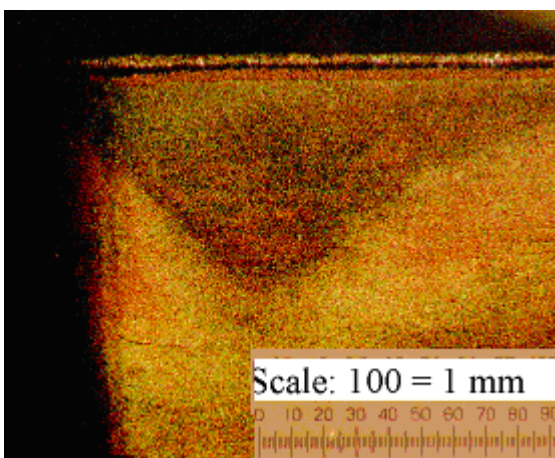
Picture showing flank wear for a dry cut after 7 minute of machining at a cutting speed of 190 m min⁻¹ and feed rate of 0.23 mm/rev with a 2 mm depth of cut
